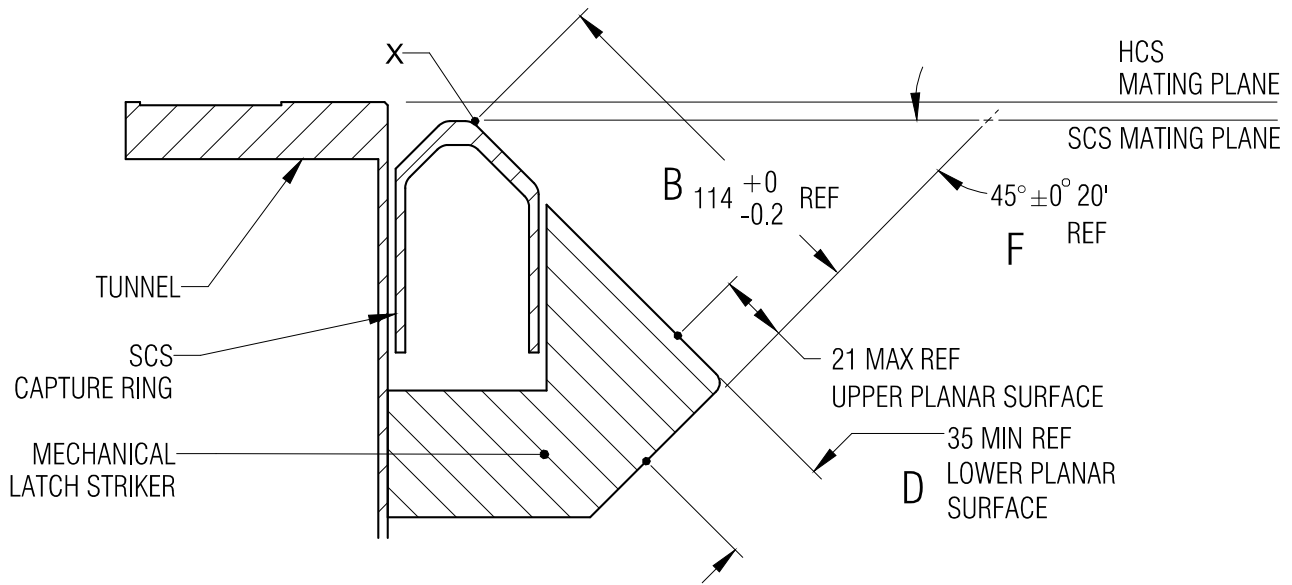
MECHANICAL CAPTURE LATCH STRIKER PARAMETER EXPLANATION - PART 2
